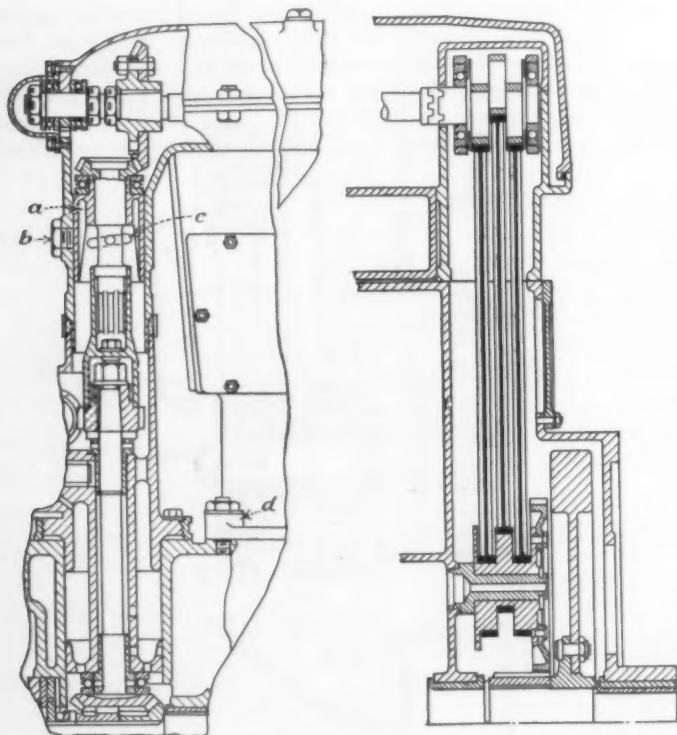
AT THE LEFT THE CAMSHAFT DRIVE USED ON THE BENTLEY ENGINE AND AT THE RIGHT A SOMEWHAT UNUSUAL FORM OF CAMSHAFT DRIVE THAT IS USED ON THE LEYLAND STRAIGHT-EIGHT ENGINE
